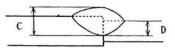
(a) When Base Metal Surfaces on the Weld Side Are on the Same Plane
